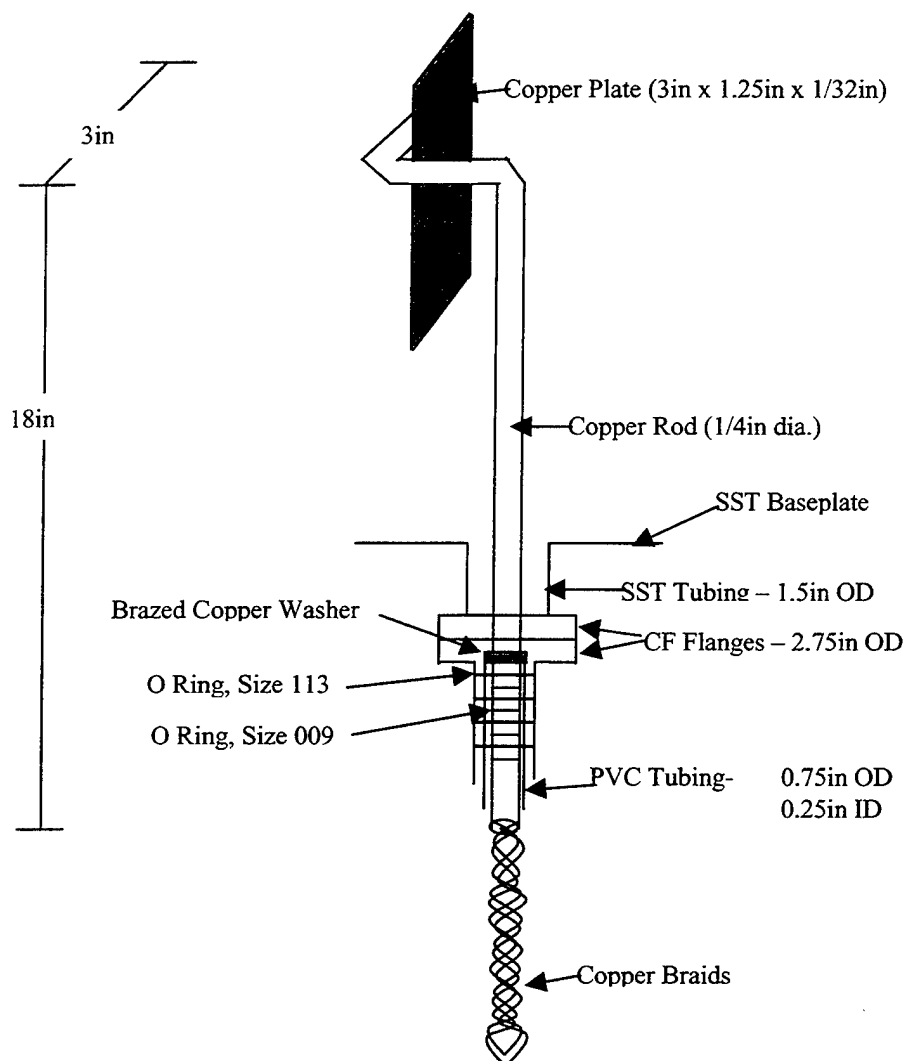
AFM scanning module cooling assembly (feedthrough 1)
